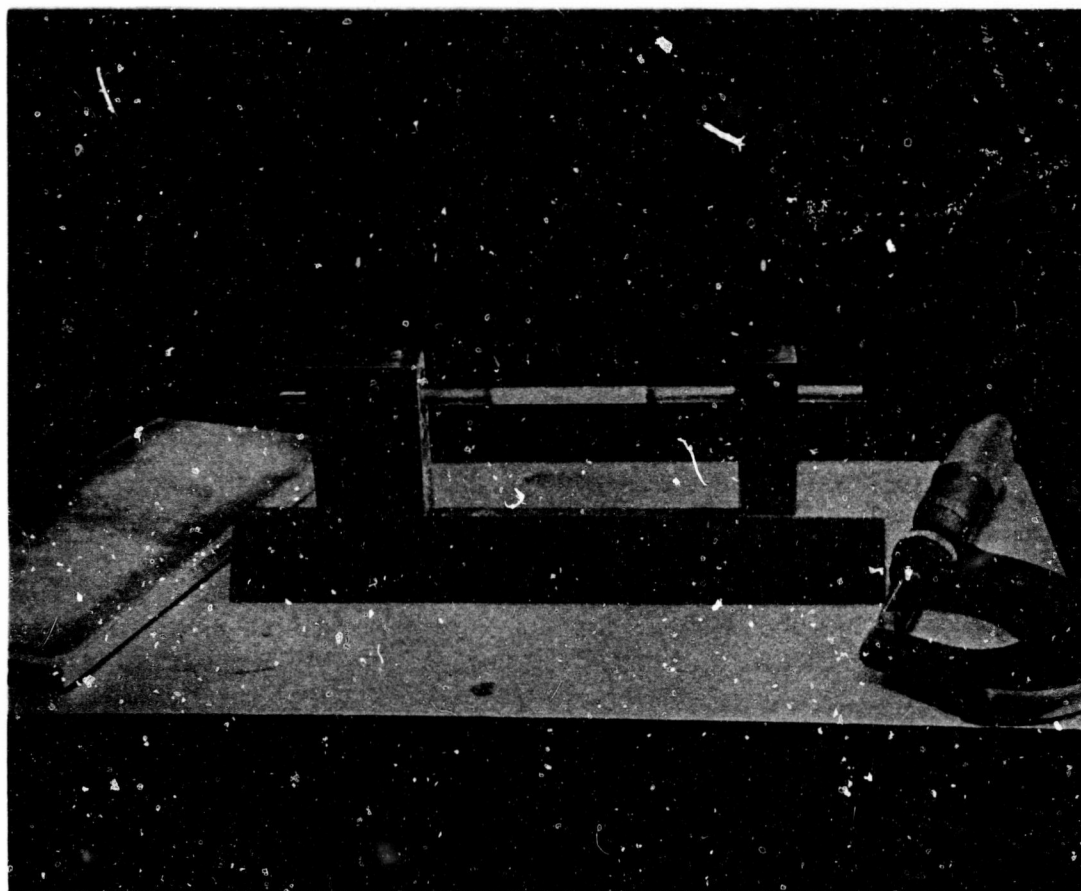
PHOTOGRAPH OF JIG FOR FORMING
